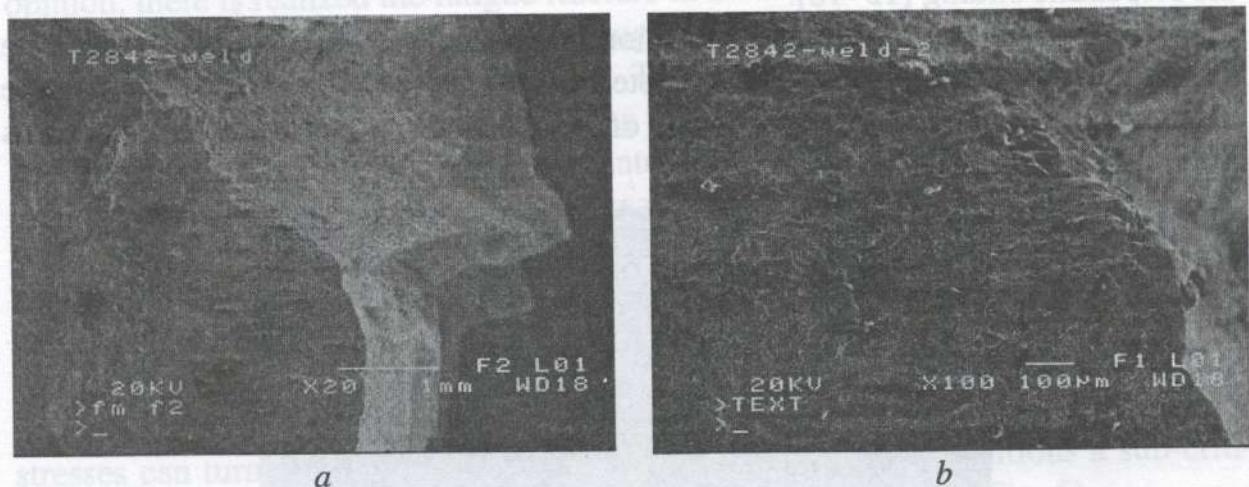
Fractograms from the PM-WJ area (18Mn–18Cr steel specimen, N 2842) after fatigue tests on air and crack propagation perpendicular to the welded joint:
